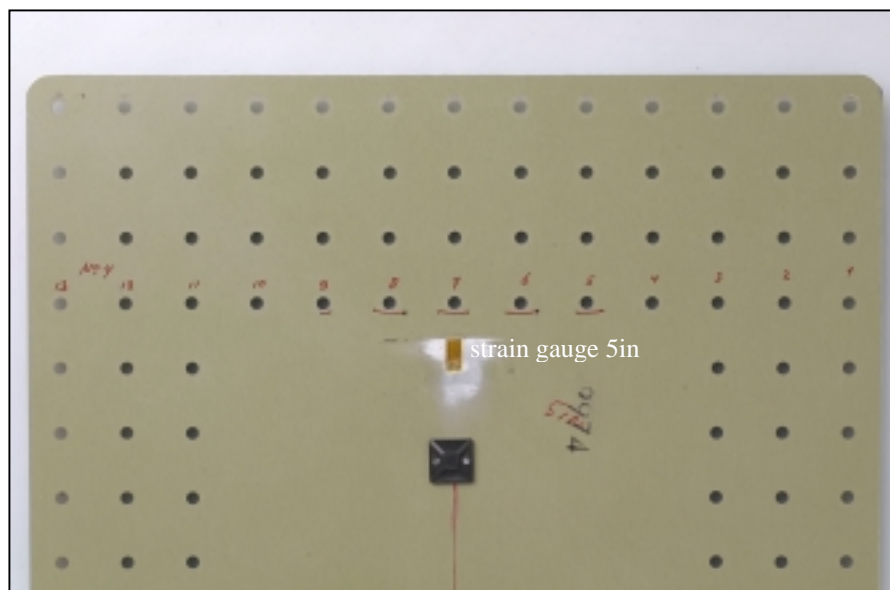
Fatigue cracks in repair patch, rivet row 4
